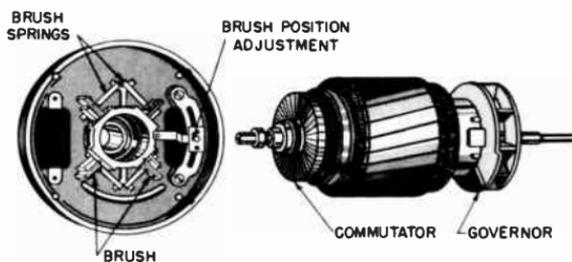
The commutator of a repulsion-induction motor with the brushes and brush shifting mechanism.
